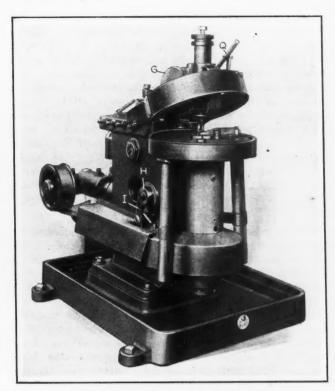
Machine used for producing the Ball Groove in the Type Bar, Assembly Views of which are shown in Fig. 9
